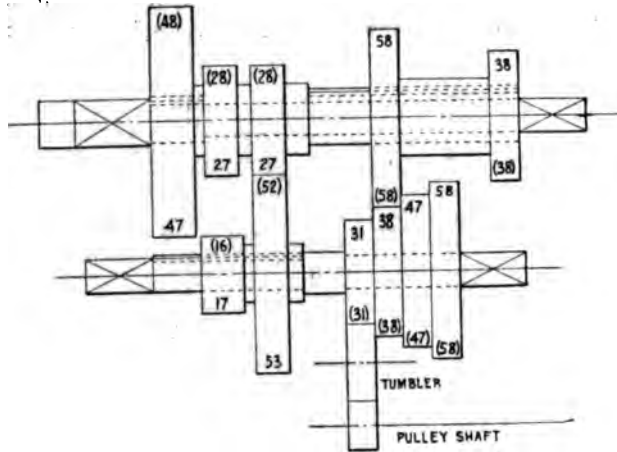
DIAGRAM OF DRIVING GEAR OF A WELL-KNOWN MAKE OF MILLING MACHINE
